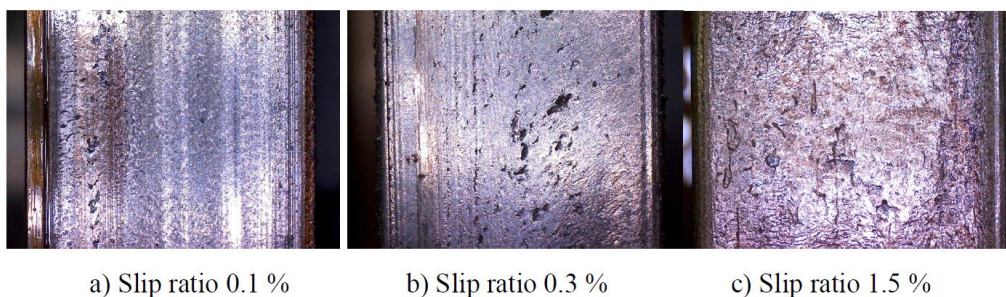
Wheel specimen surfaces after wear testing at different slip ratios on a twin disc testing machine [213].
